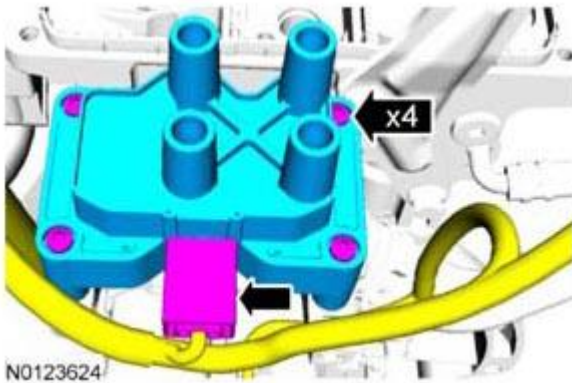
Locating Ignition Coil Electrical Connector And Screws
